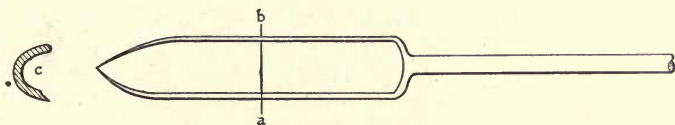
"POD" AUGER FOR ROLL BORING.
